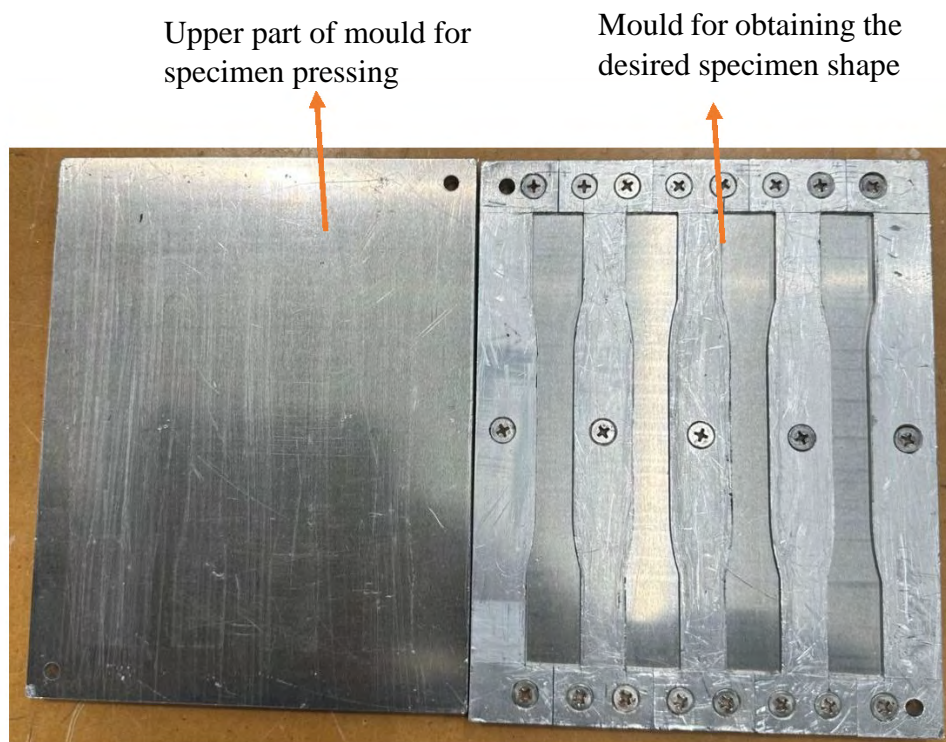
Mould of aluminium used to prepare carbon fibre tensile specimen.
